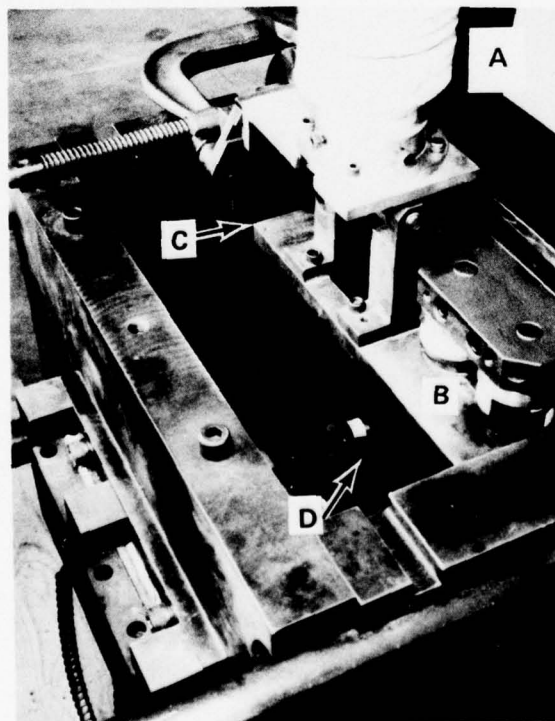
Mechanical Transfer System Showing A) Preform Heater B) Preform Platform C) Cam Follower & Surface and D) Injection Ram
